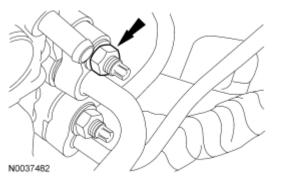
Locating A/C Tube To Condenser Nut Courtesy of FORD MOTOR CO.
